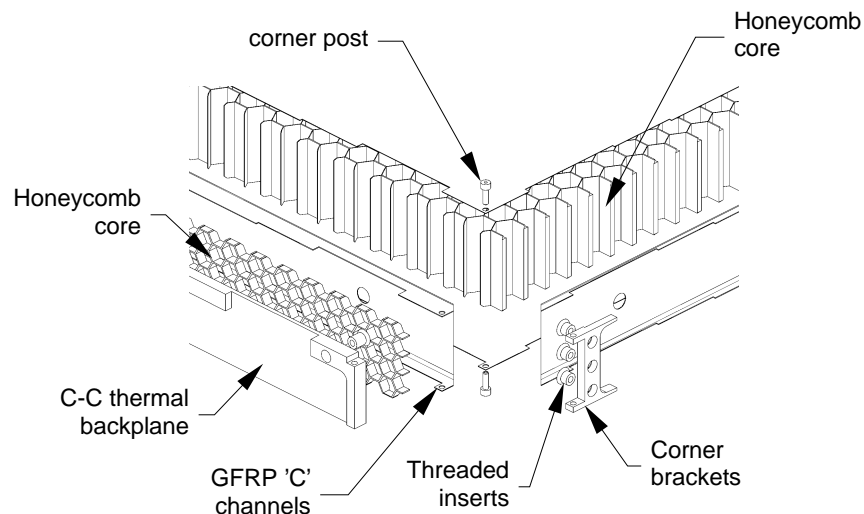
Exploded view of Concept 1 composite tray assembly, close-up on corner details.
